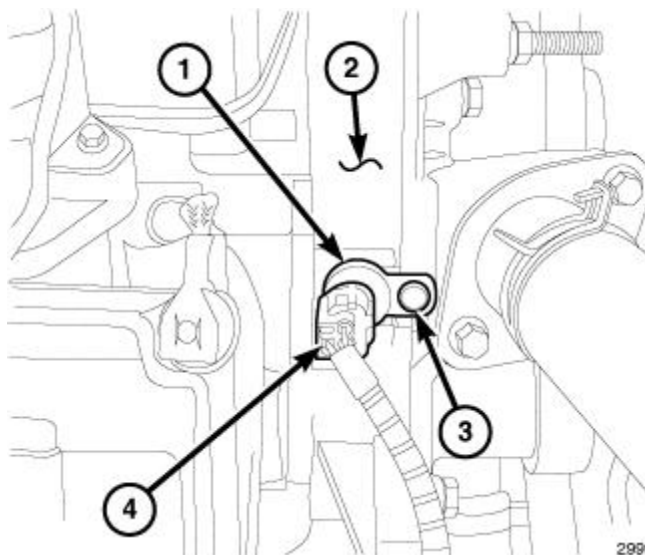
Camshaft Position Sensor, Connector, Bolt & Timing Cover
